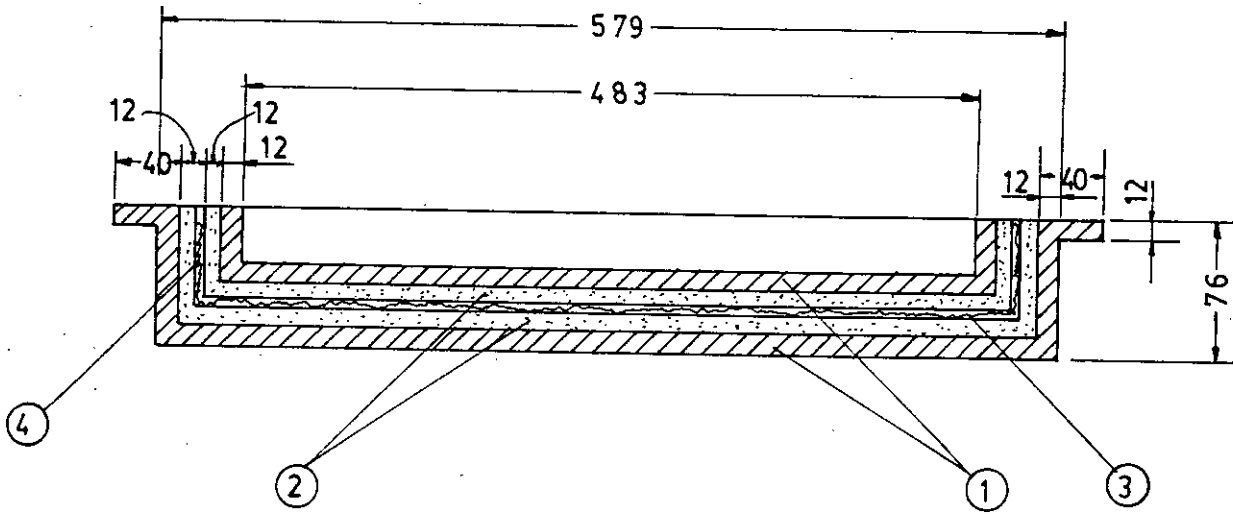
DETAILS OF HOT PLATE ASSEMBLY FOR RECTANGULAR CORRUGATION
